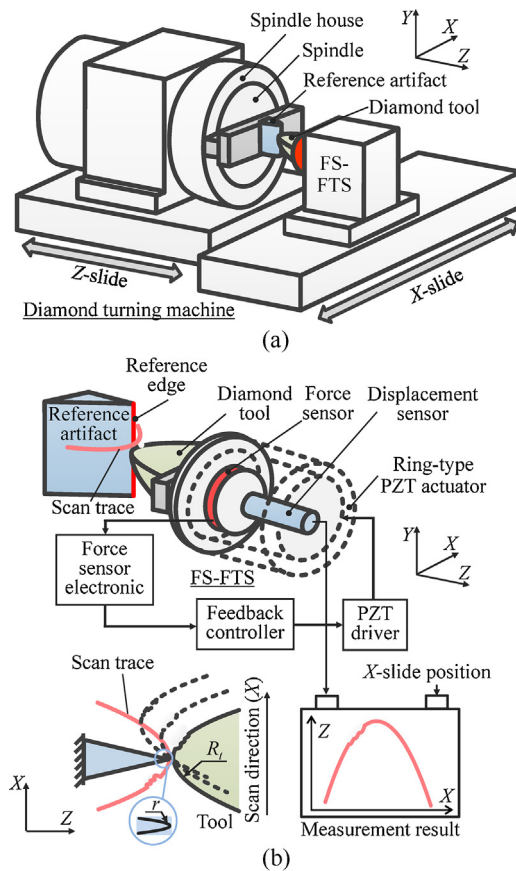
(a) A schematic of the on-machine measurement system. (b) Principle for measuring the cutting edge contour and edge wear of a diamond tool with the FS-FTS on a three-axis diamond turning machine.
